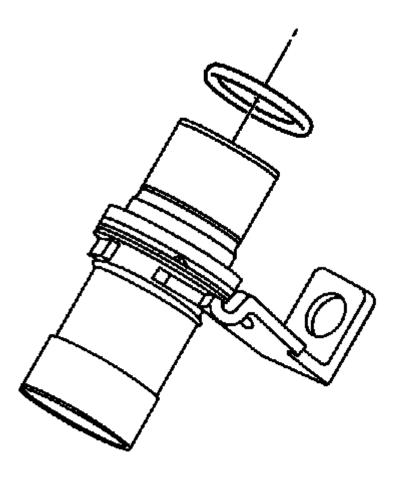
View Of Crankshaft Position Sensor Seal O-Ring Courtesy of GENERAL MOTORS CORP.
